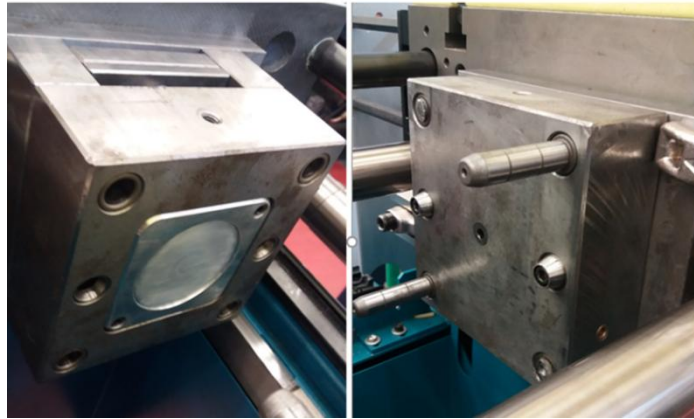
A photograph of the two parts of the mould used in this work mounted on the BOY 22A Injection Moulding Machine.
